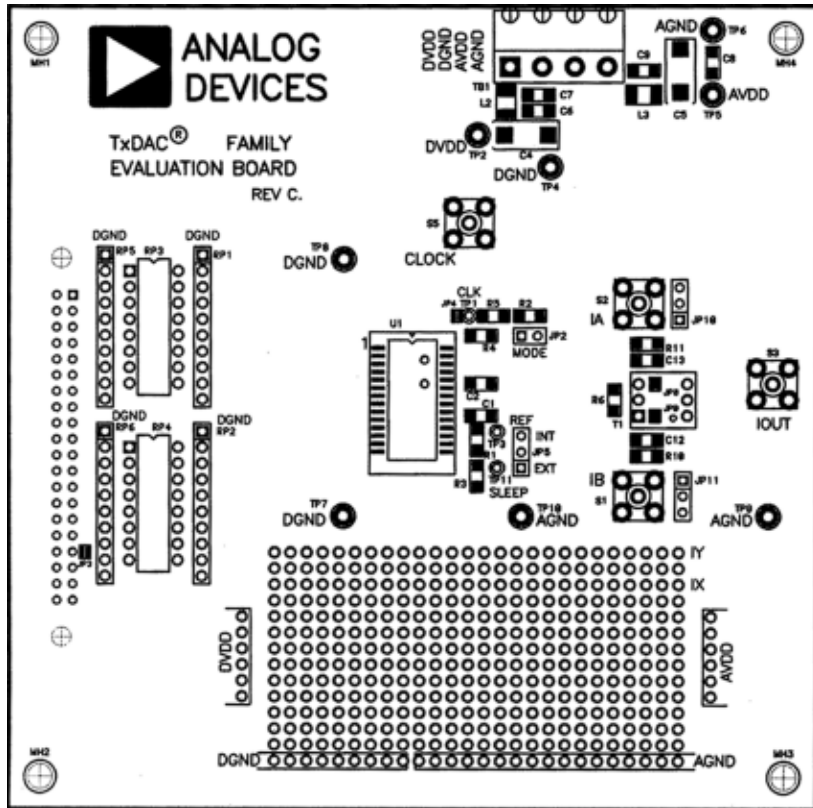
SOIC Evaluation Board Assembly—Primary Side
